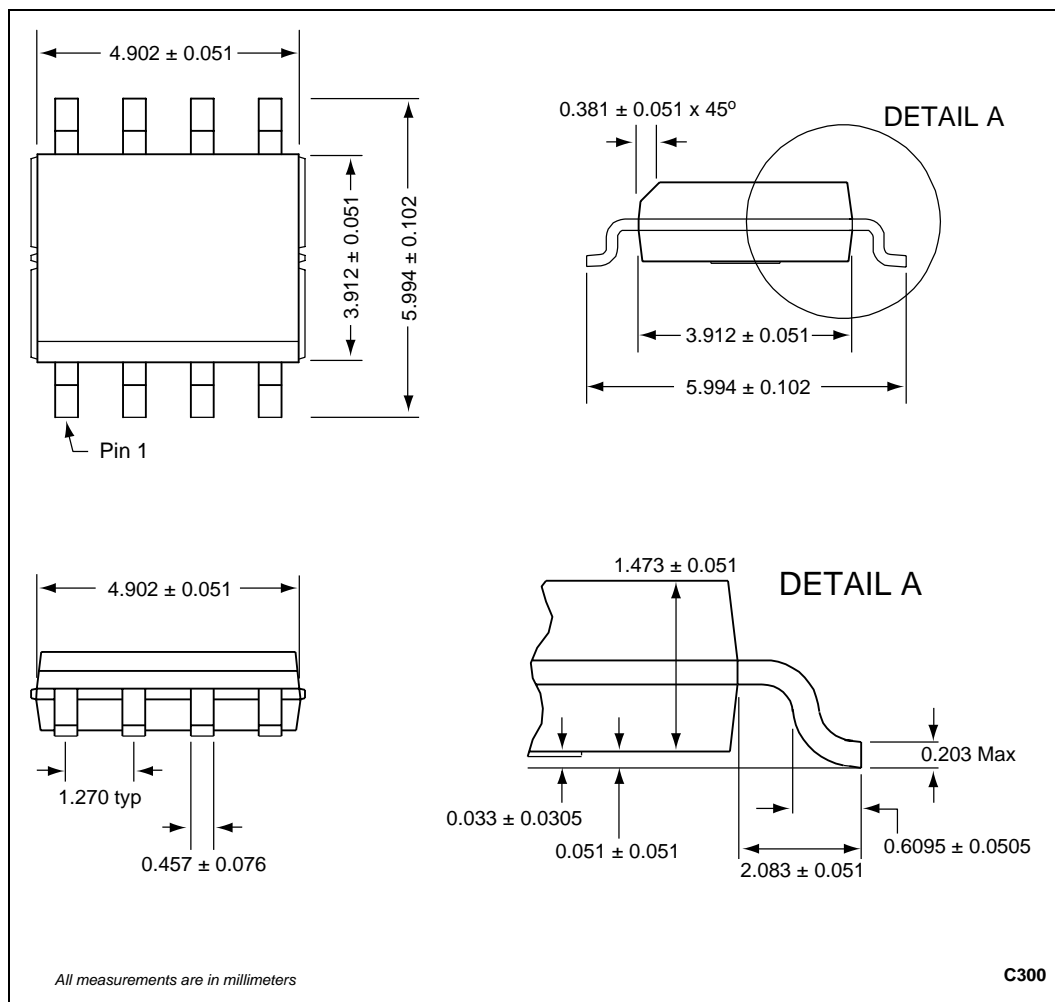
CX65002 8-Pin SOIC Package Dimension Drawing
